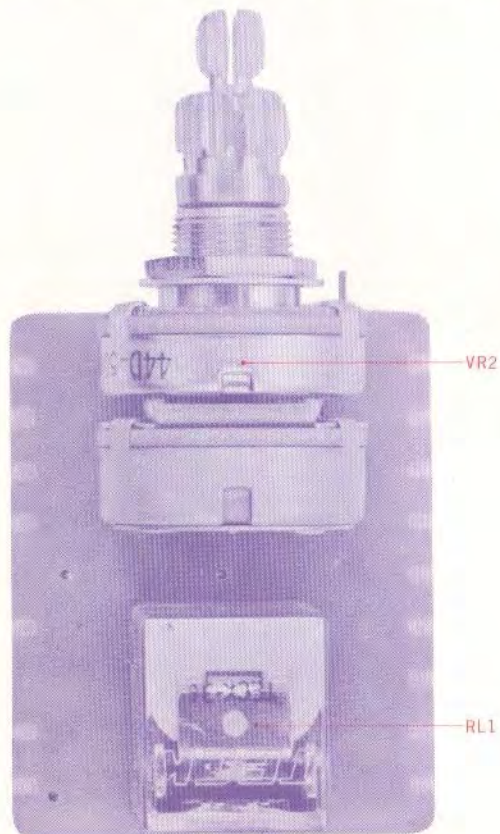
PHOTO OF VOL. P.C. BOARD (TD-5010) BLOCK
